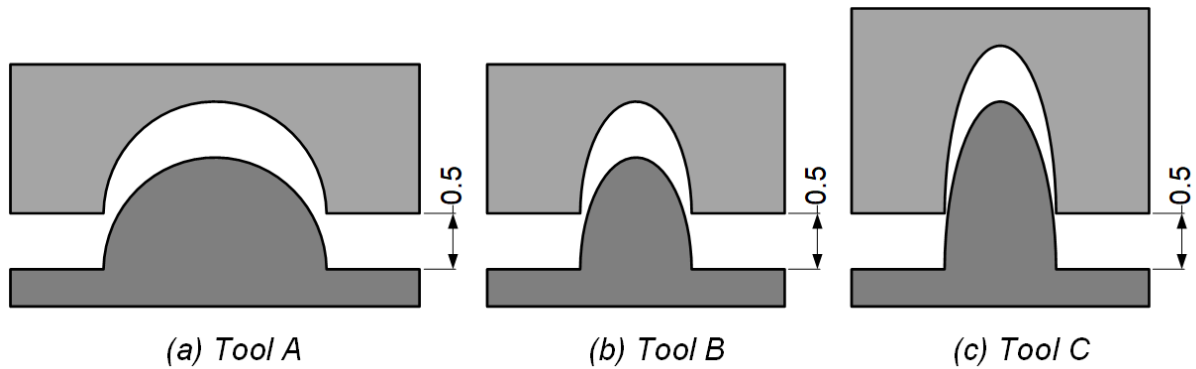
Assembly models of tool A (a), tool B (b), and tool C (c).
